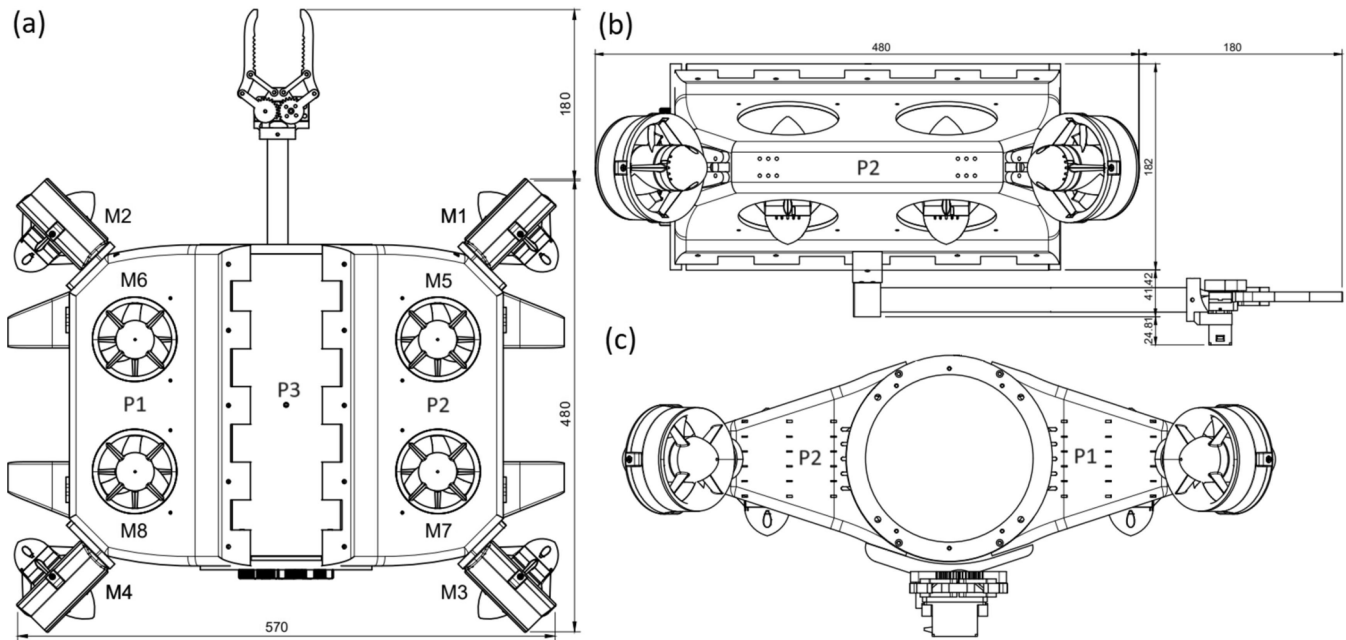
Conceptual design and dimensions of the vehicle with the tool attachment: (a) top view, (b) side view, and (c) front view (sizes in mm).
